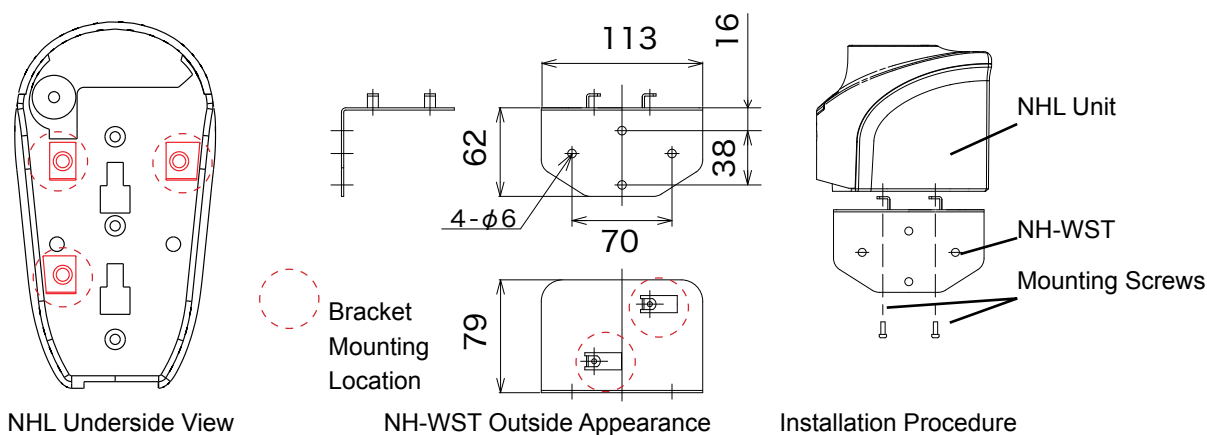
Wall Mount Bracket Installation Diagram
